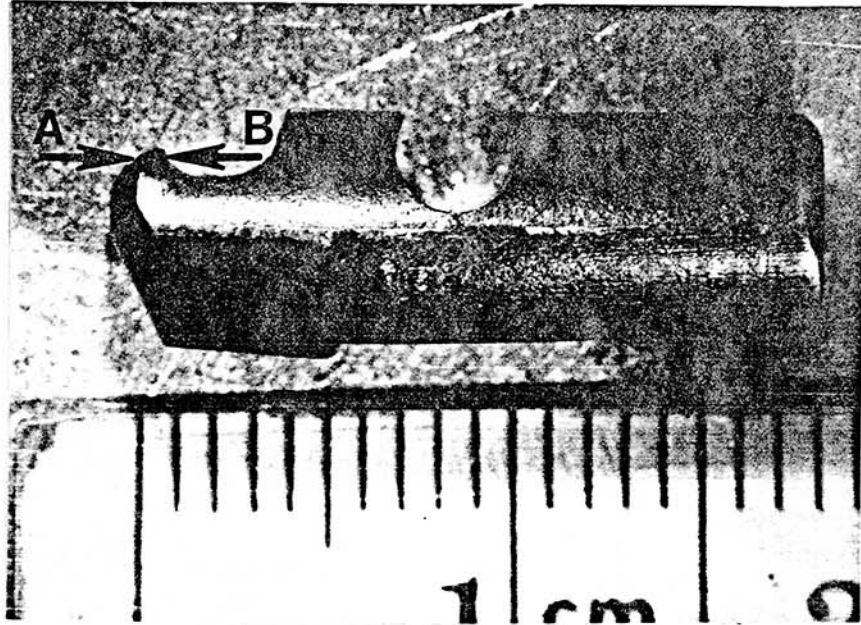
Profile view of extractor with the direction of both applied loads identified. A - compressive impact load, B - tensile load.
